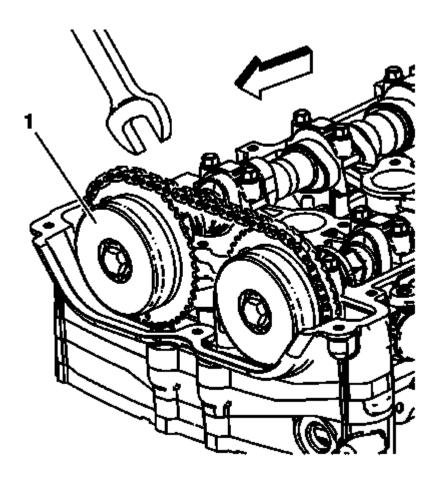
Actuator Courtesy of GENERAL MOTORS COMPANY
